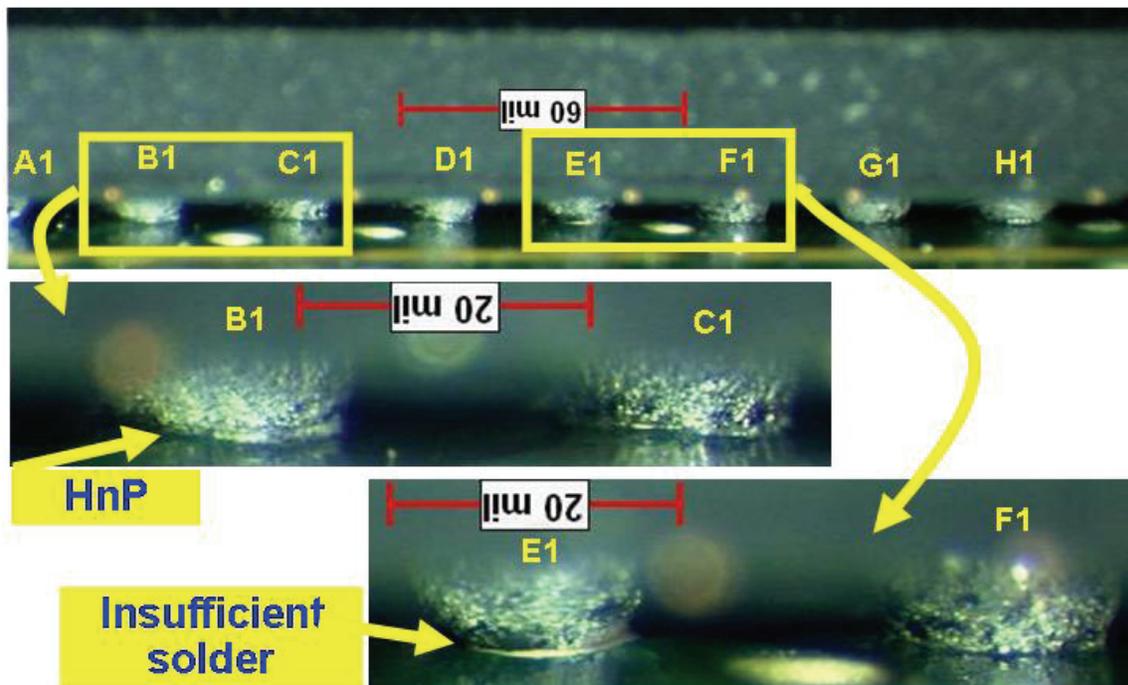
Optical inspection images of outer edges of BGAs is a time-consuming process but it may be necessary to detect HnP or insufficient solder defects.
